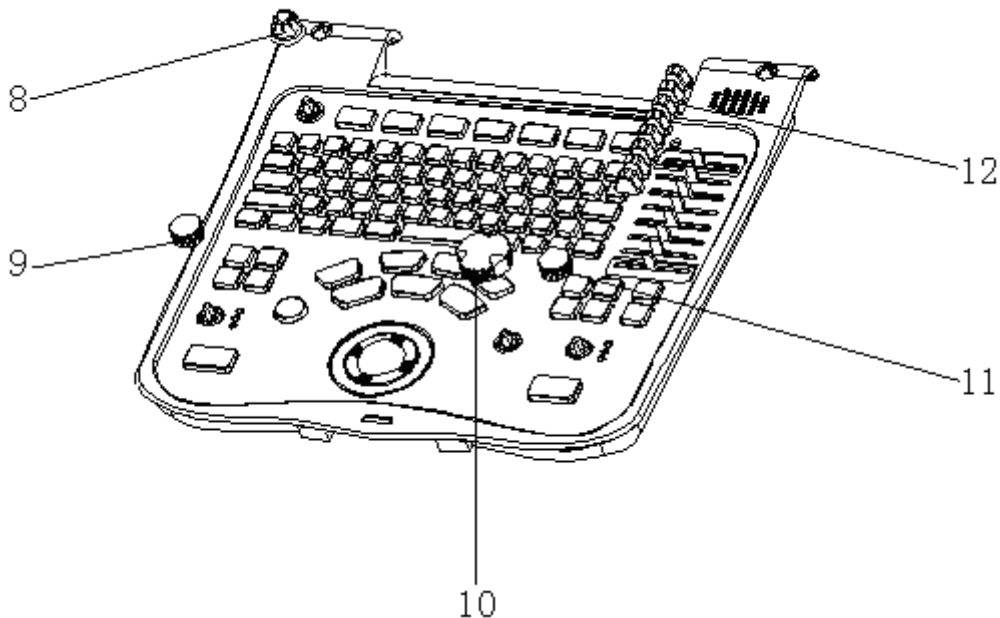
Sketch Map of Keyboard Knobs Disassembly
